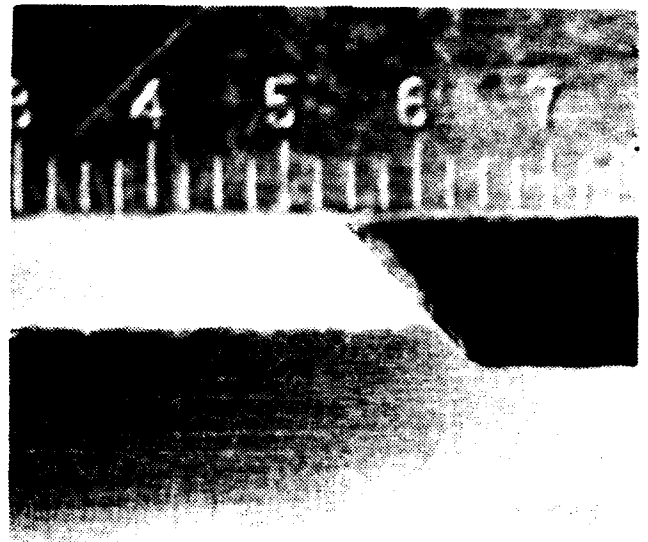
Steel Specimen, unpainted, right end of section, 7.5 X.
